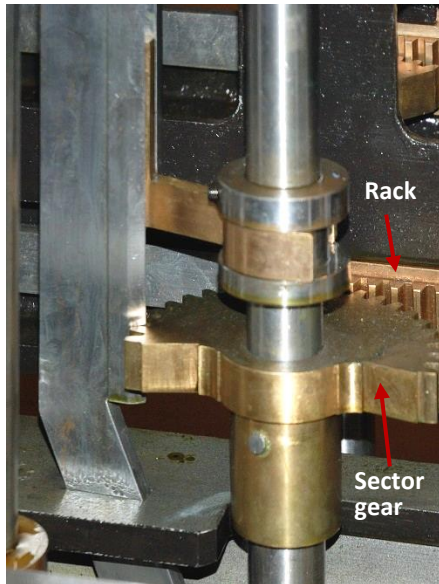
Circular motion rack and sector gear. Figure wheel axis (A/171) (detail).
